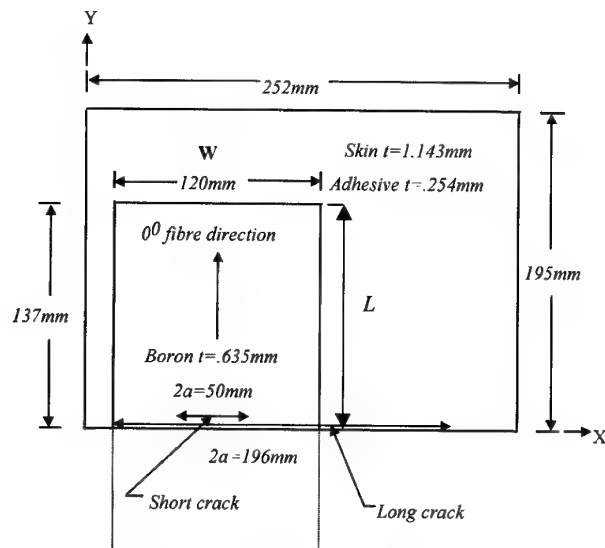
Dimensions of simplified F/A-18 nacelle inlet panel, with crack and patch.
